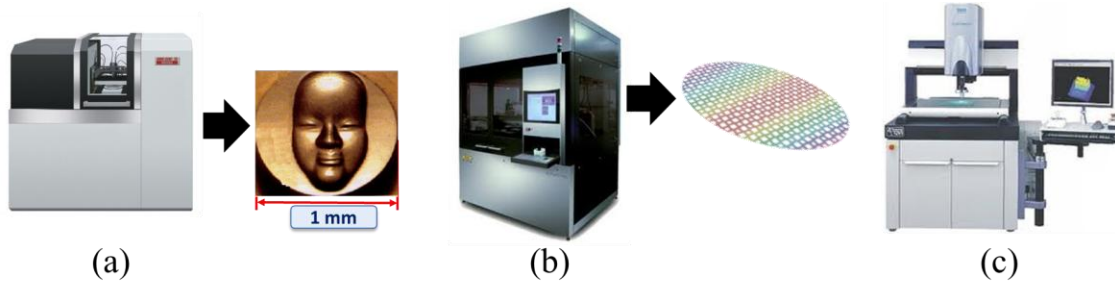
Examples of UPM Machines: (a) Ultra-Precision Machine Tools (b) Wafer Scanner and (c) Micro Coordinate Measurement Machines
